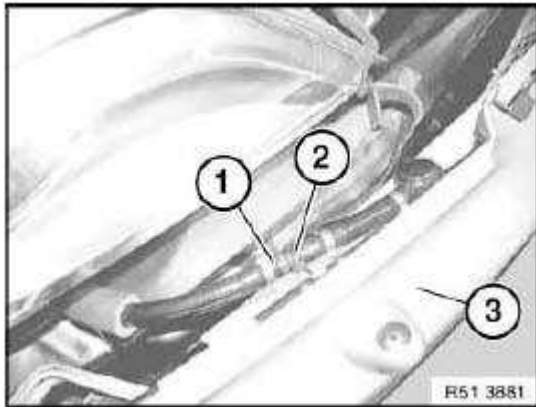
Hose, Bumper Trim And Seal Pump Outlet
